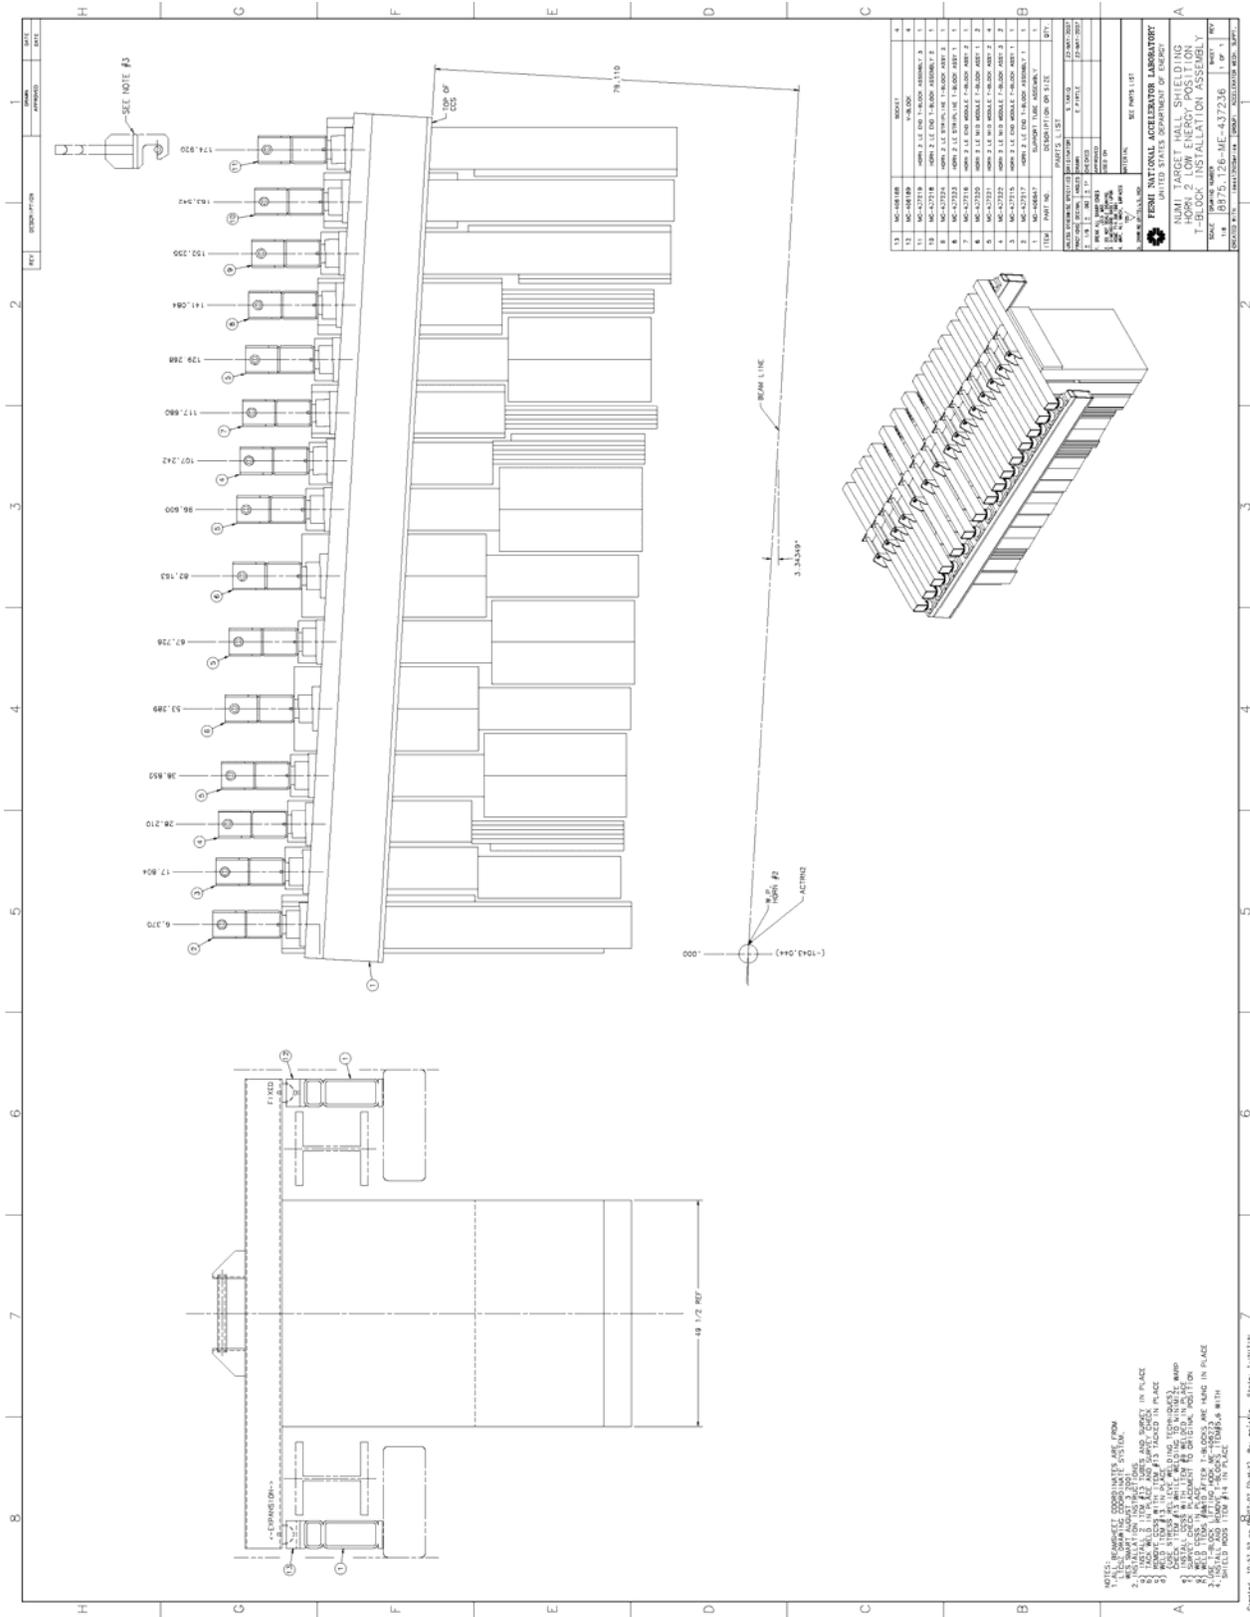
Revised shielding T-block design pattern and support tube assembly to be installed at the LE location.
